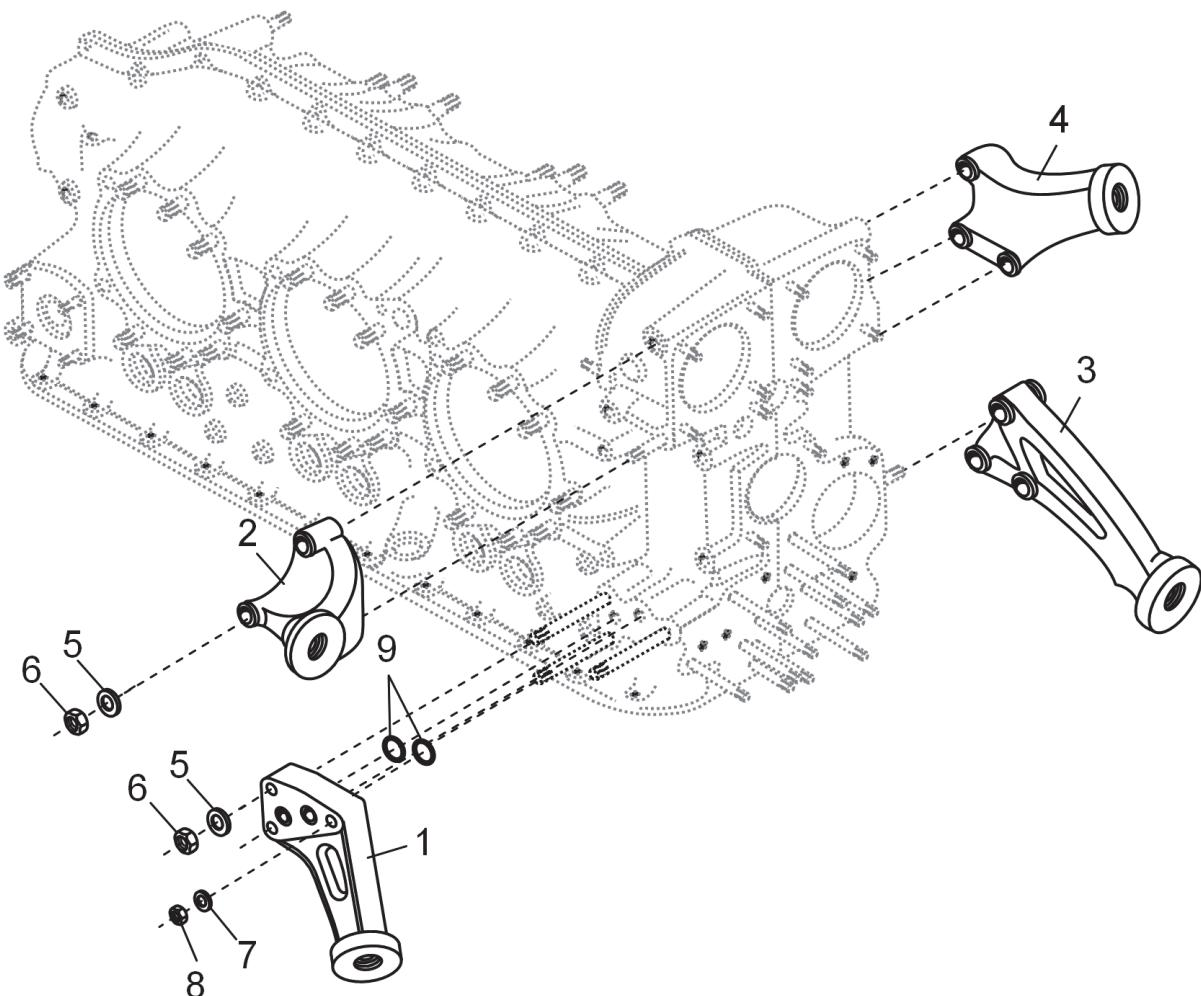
IO-550-C Engine Mounting Brackets C
